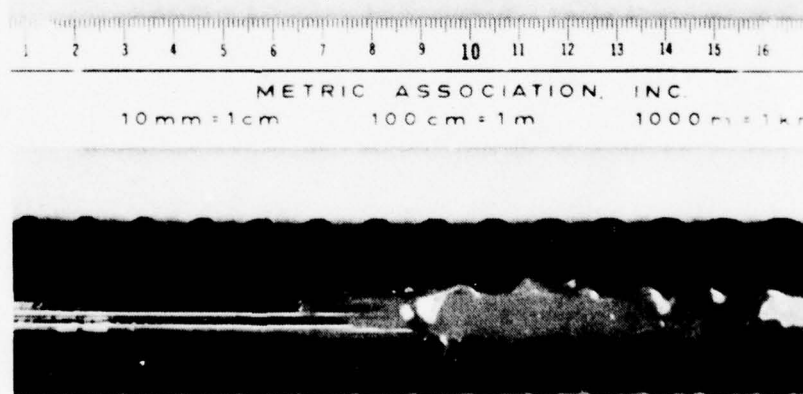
Filling Slot Containing Strain Gauge Lead Wires with Structural Adhesive
